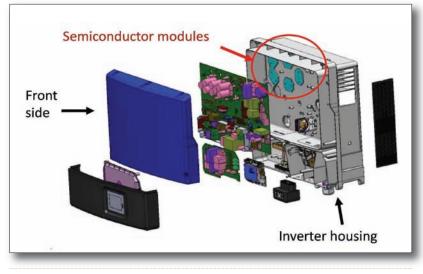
Exploded view to a three phase PV inverter - Sunny TRIPOWER [6]
